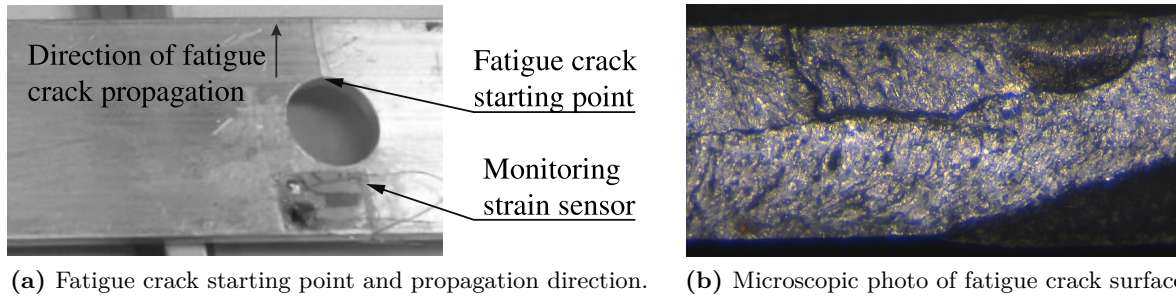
Fatigue failure of aluminium specimen.
